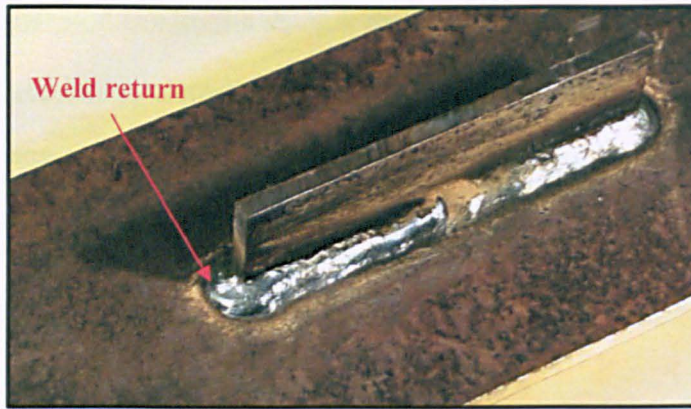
Weld return location on a steel fillet welded specimen with longitudinal attachments.
